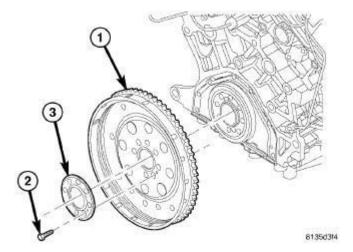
Flex Plate Courtesy of CHRYSLER LLC
